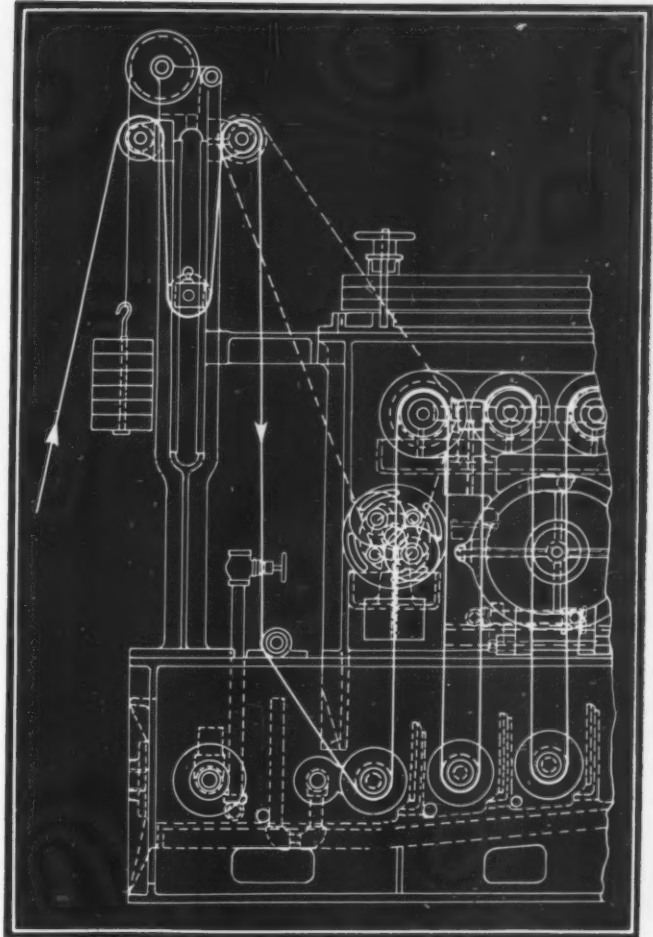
Drawing of dancer roll mechanism, in mercerizing process, showing balance weights
